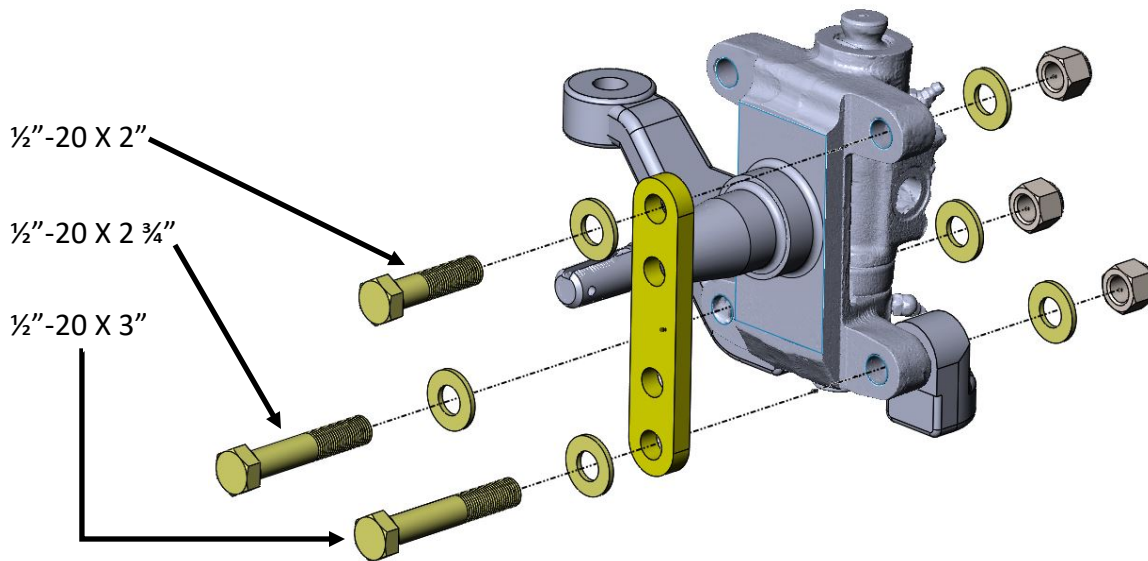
Primary Caliper Mounting Bracket Installation (Passenger Side Shown)
